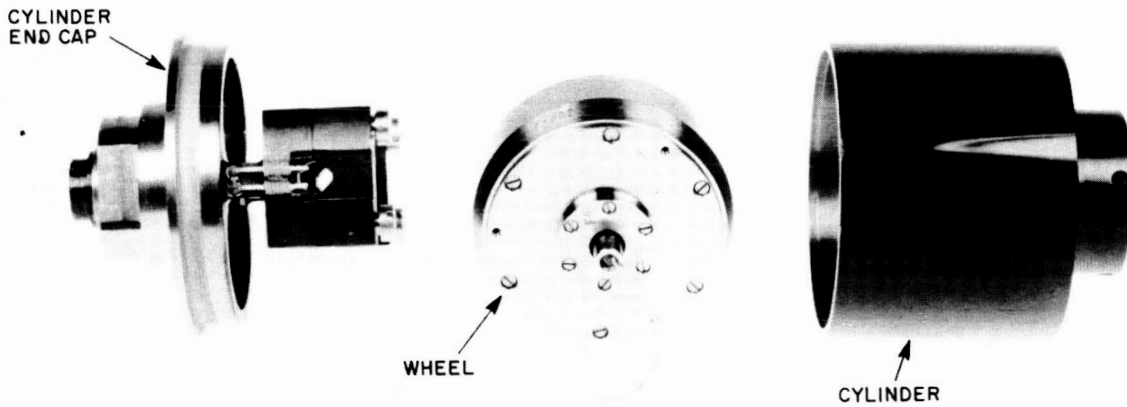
AB5-K8 INNER CYLINDER ASSEMBLY.
